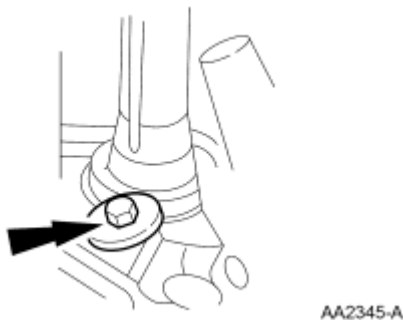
Locating Camshaft Synchronizer Retaining Bolt
